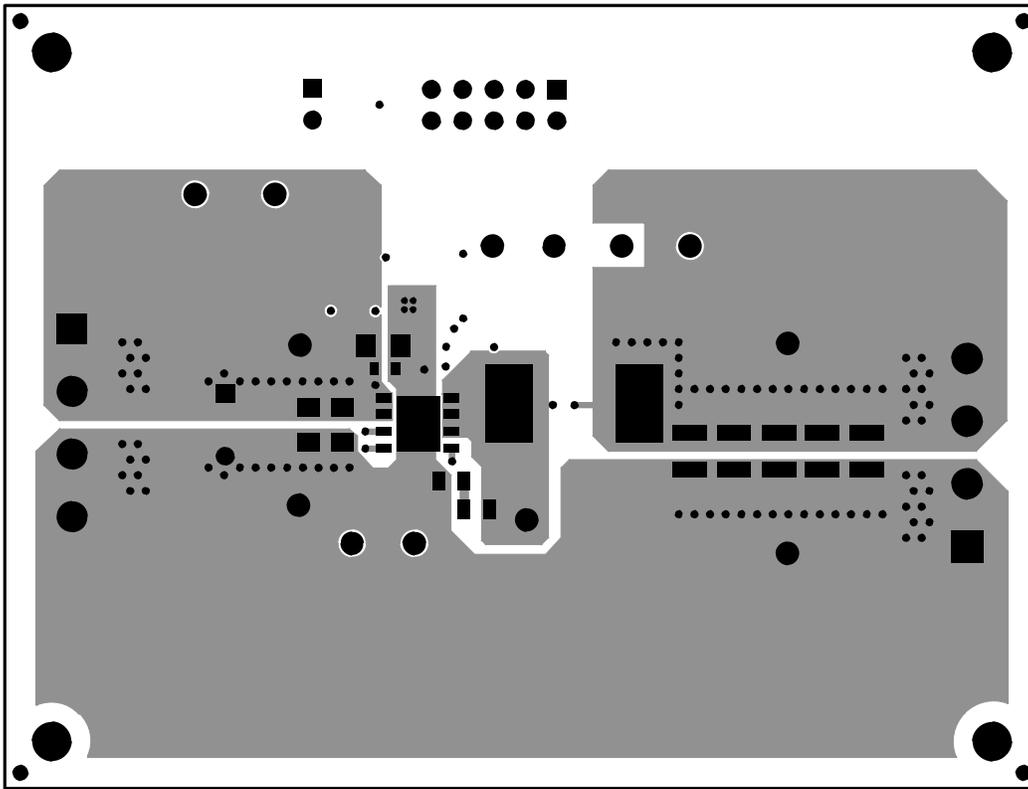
TPS53819AEVM-123 Top Copper (Top View)
